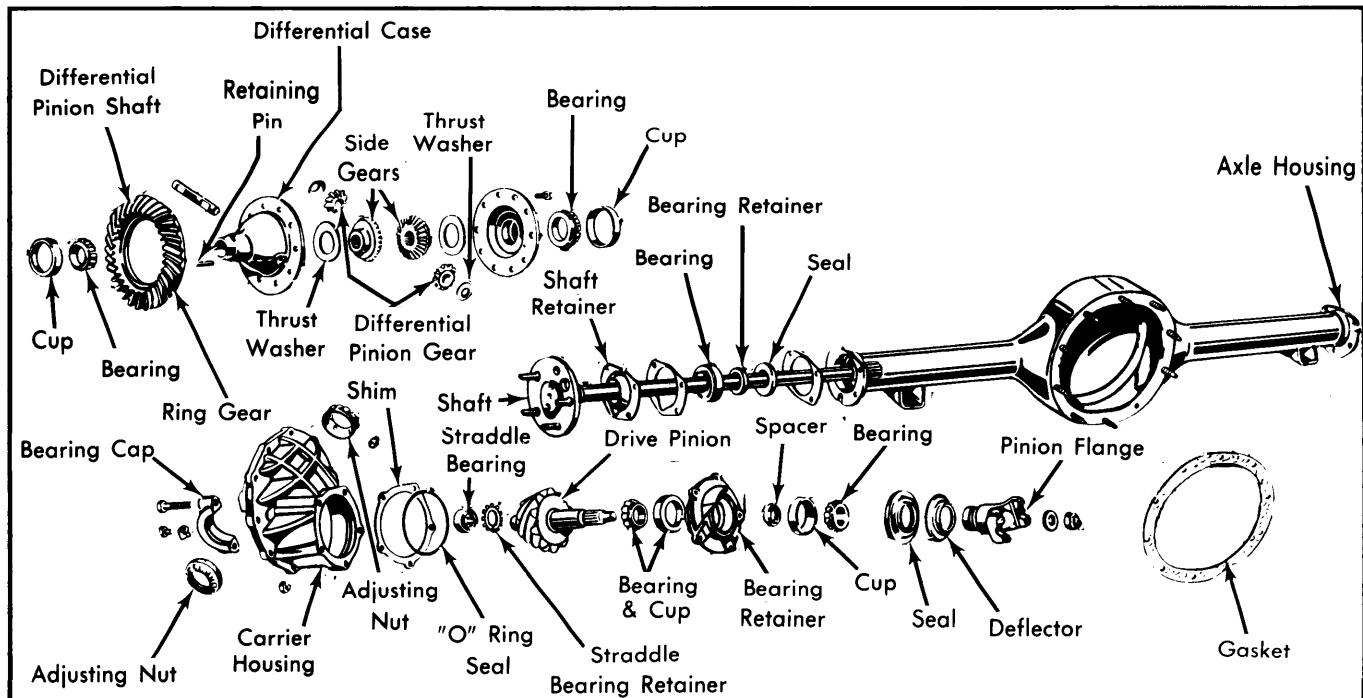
Exploded View of Ford Separate Housing Drive Axle Assembly
